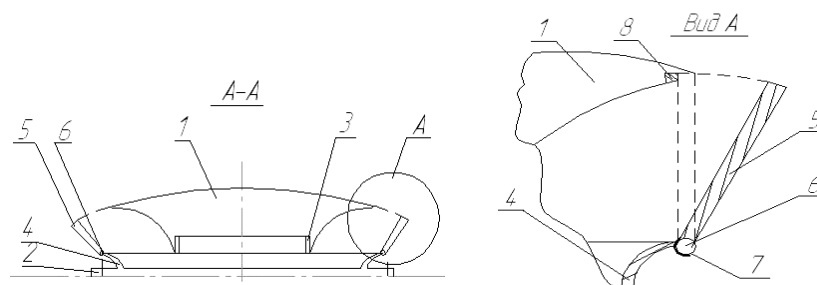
Scheme of the diffuser type flap louvre apparatus of the cooling device of the locomotive: 1 – fan radome; 2 – the body of louvre apparatus; 3 – reinforced rubber units; 4 – outlet channel of diffuser shape; 5 – louvre shutters; 6 – swing joints; 7 – torsional spring; 8 – rubber joints.
